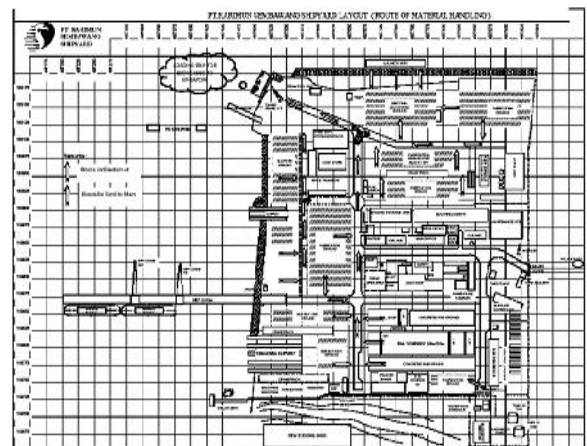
Suggested Block's Location and Travelling Route
